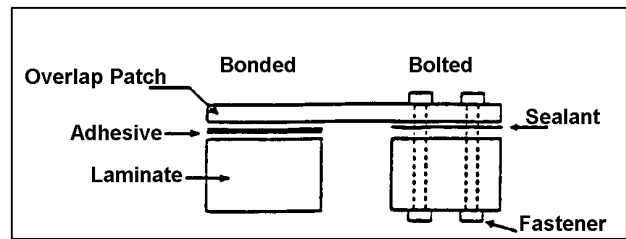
Cross section of bonded and bolted overlap repairs.
